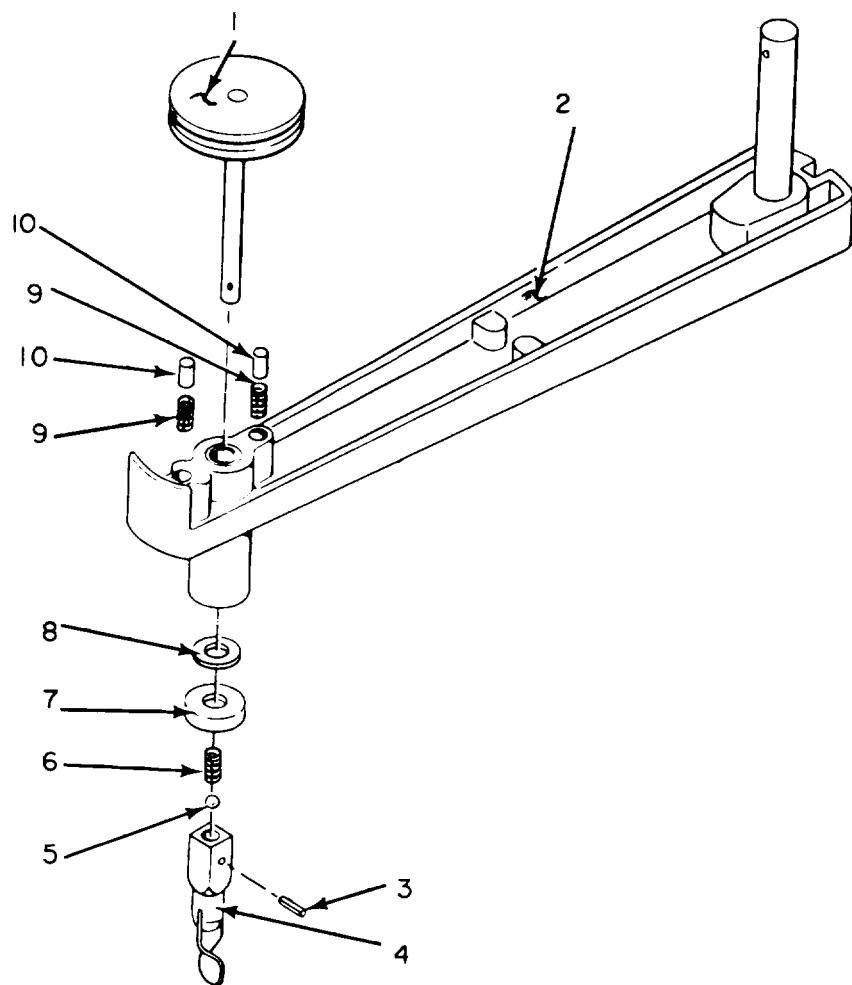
Projector AQ-9A1 Drive Unit Assembly
